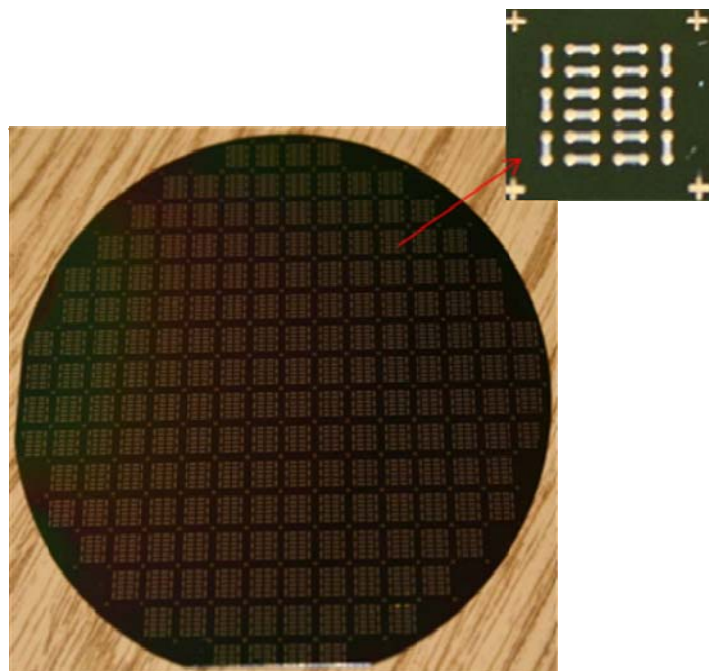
Wafer of WLCSPs without SolderBrace coating and WLCSP close-up view
